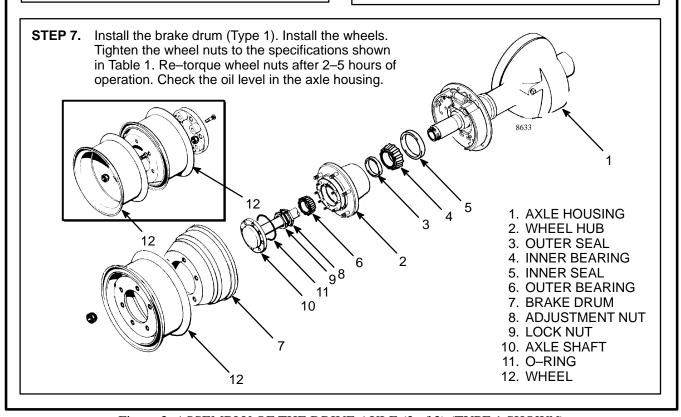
ASSEMBLY OF THE DRIVE AXLE (2 of 2) (TYPE 1 SHOWN)
